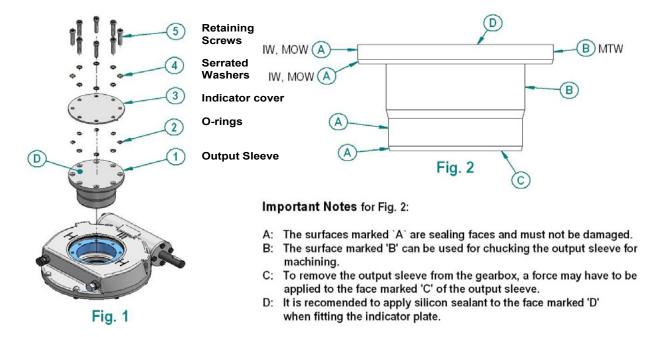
shows the removal of the output sleeve from the gearbox. See Fig.2 for removing the output sleeve without damaging the sealing faces.
